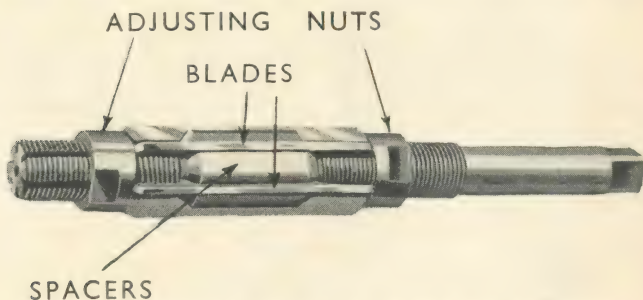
EXPANDING SIX BLADE REAMER FOR PRECISION REAMING OF GUDGEON PIN HOLES IN SMALL END AND PISTON BOSSES
